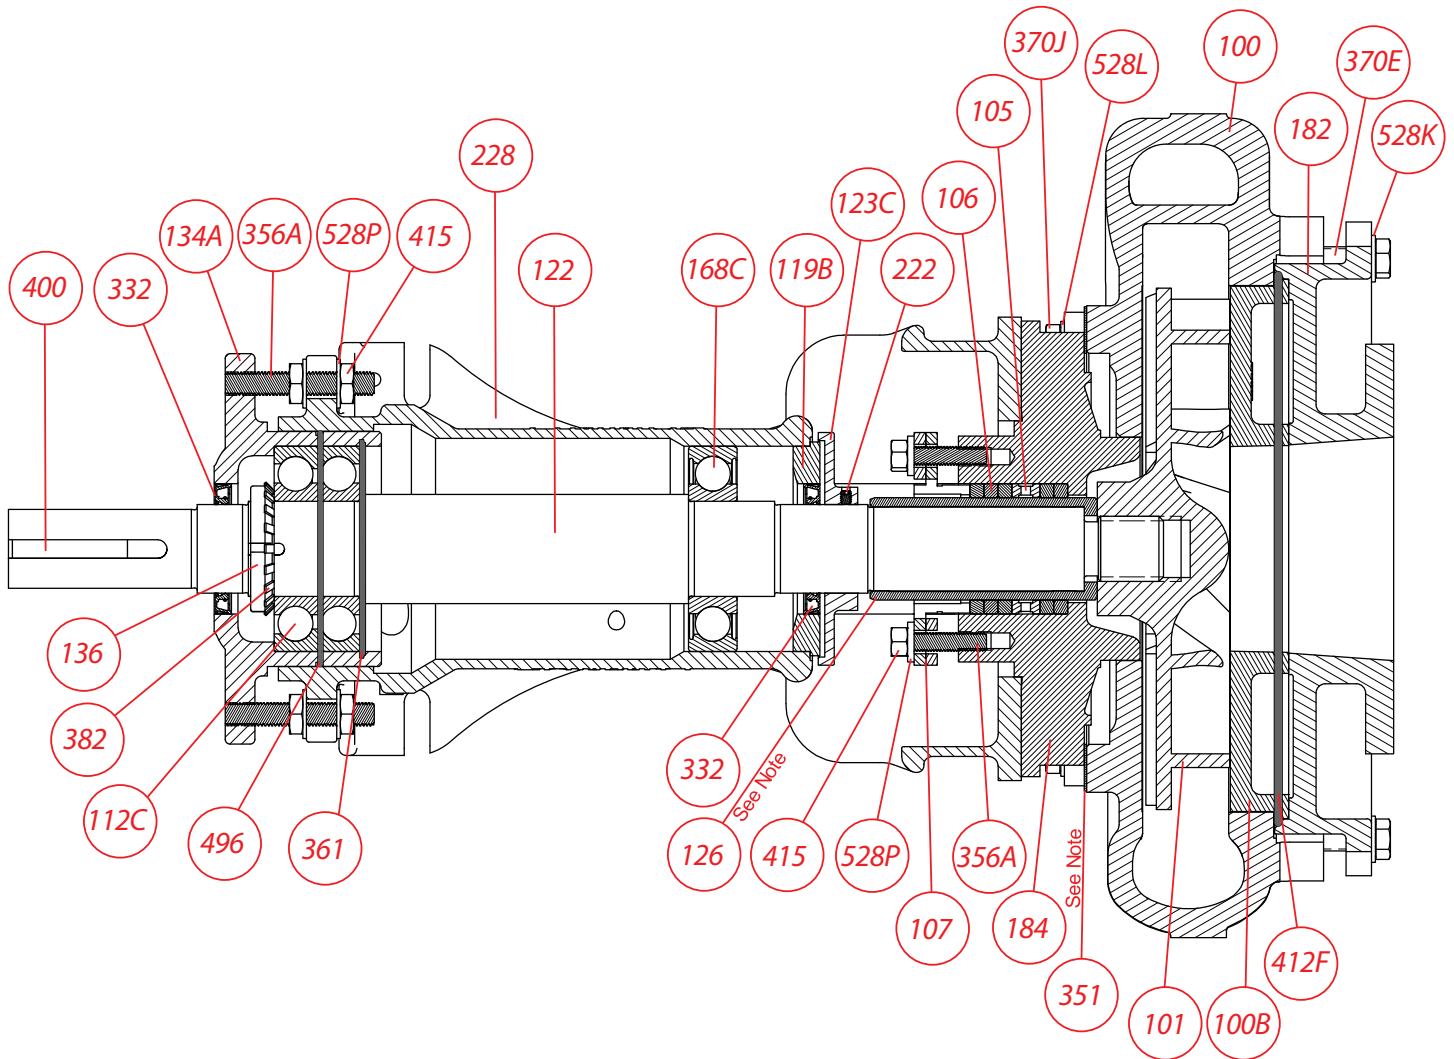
Assembled cross section TOP view. Refer to Table 8-1.
